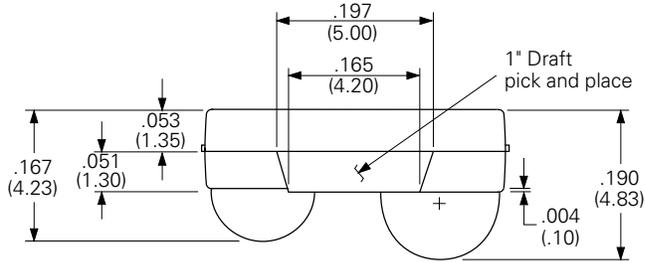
IRMS6452/IRMT6452 detail drawings with optional side view or top view mounting
